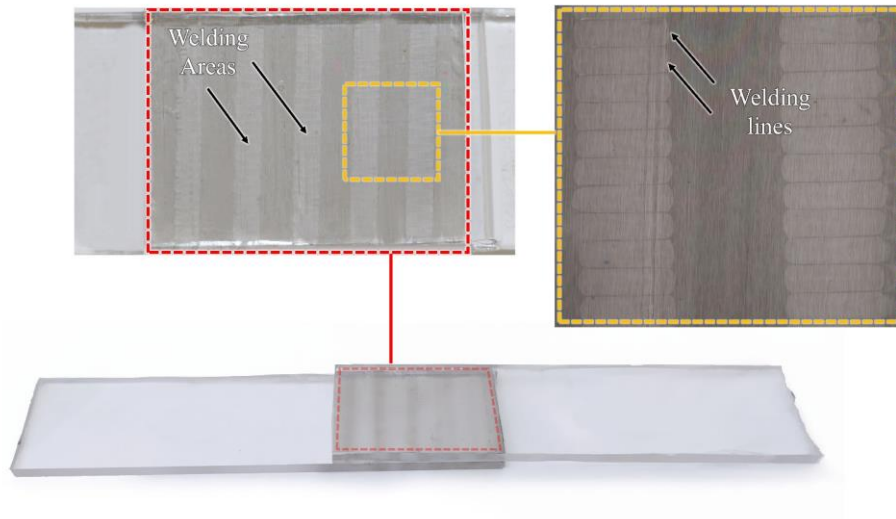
Welded sample with 5 weld areas 3 mm apart (lighter zones) and in the detail the single weld lines each 800 μm wide.
